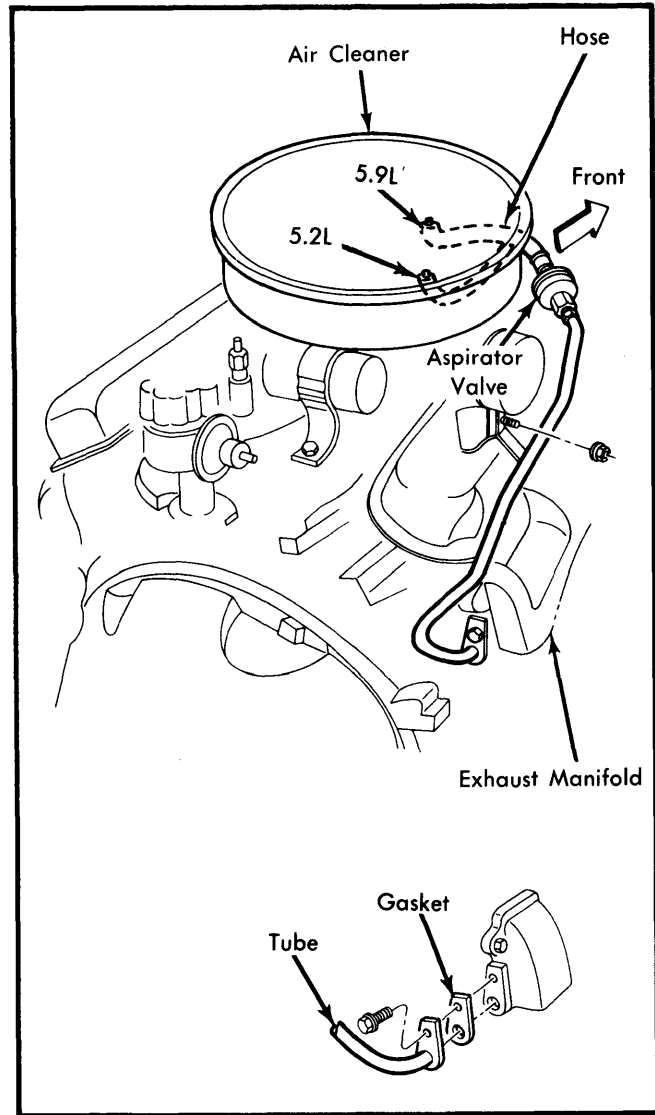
Aspirator Air System Assembly (V8 Shown - 6-Cylinder Similar)
